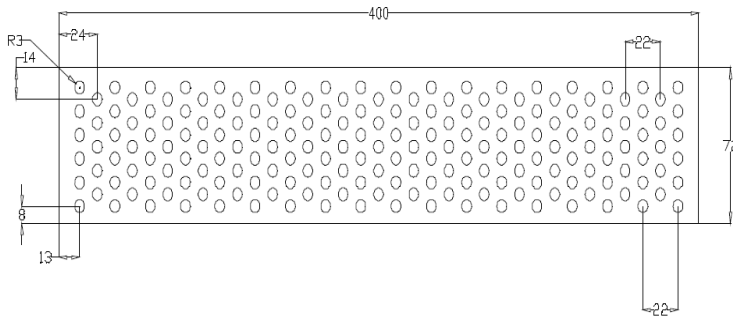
Schematic of test plate with 187 spherical staggered dimples
